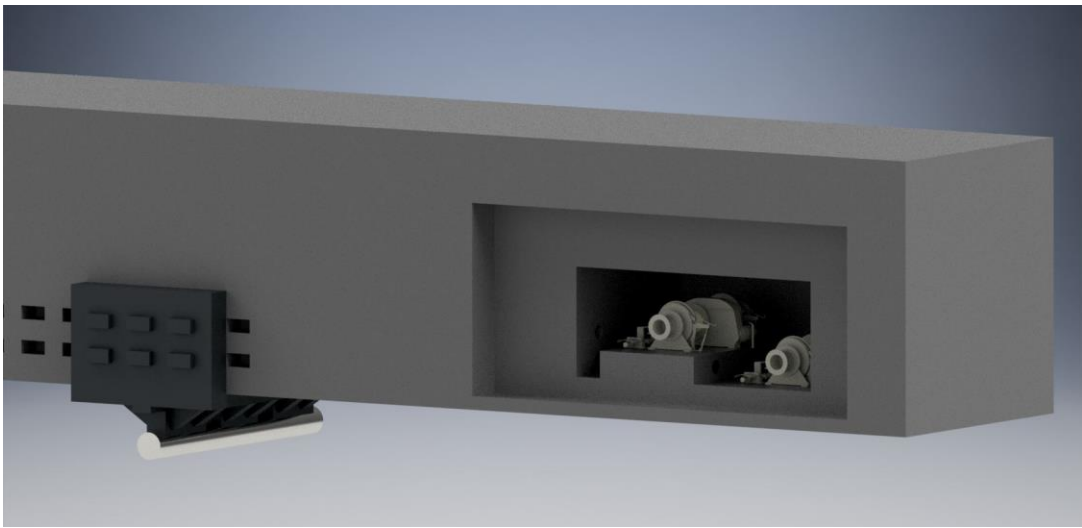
Winch System Upend/Tilt-over System and Pivot Construction TLB
